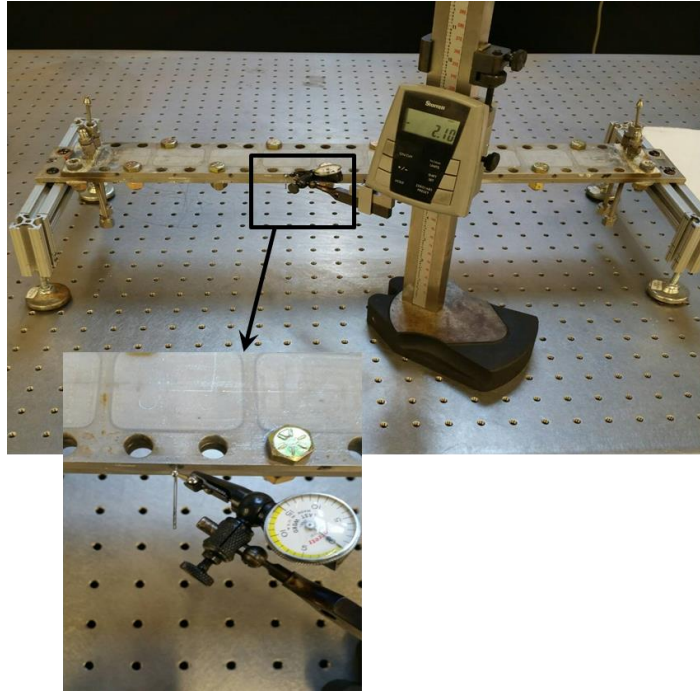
Image showing measurement of the thermocouple hole location using the coordinate measuring machine (CMM)
